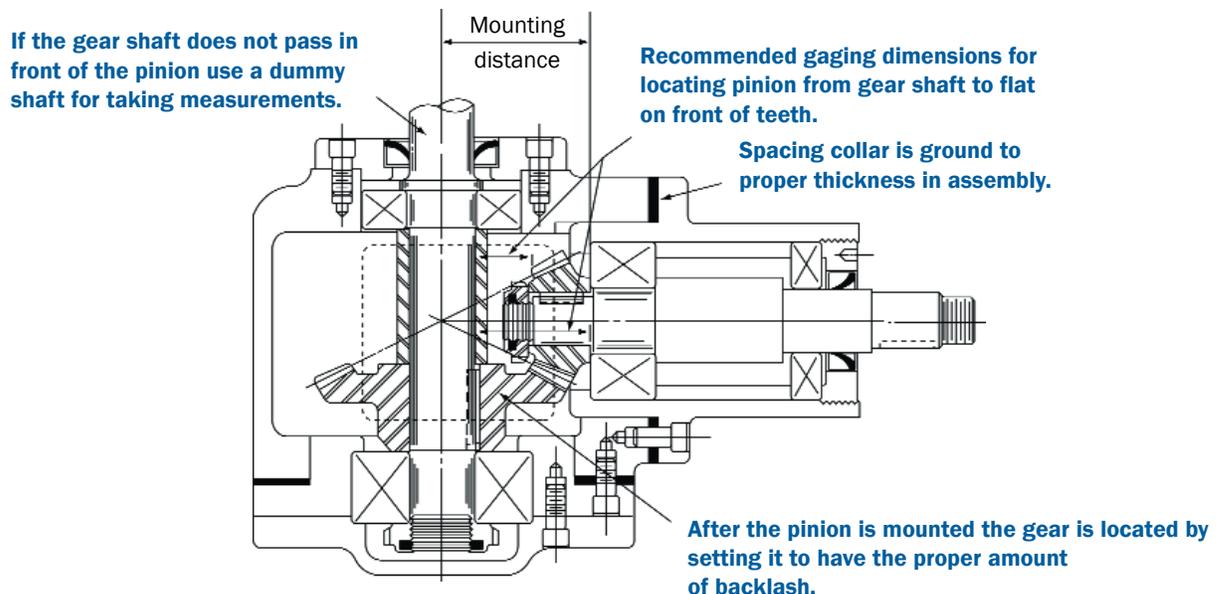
Measuring or gaging as shown is the recommended method for locating the pinion. Pinion should be set to mounting distance marked on pinion, and gear should be adjusted to give correct backlash.
